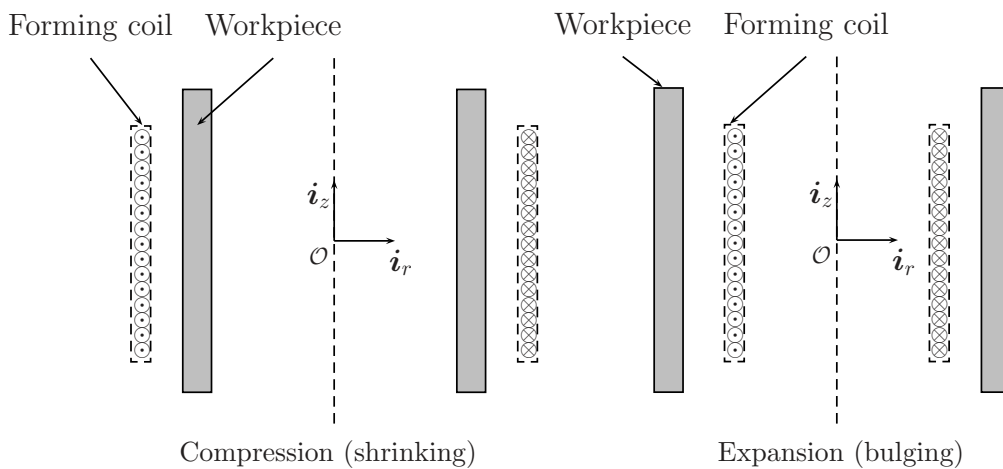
Longitudinal section of the forming coil and the workpiece.
